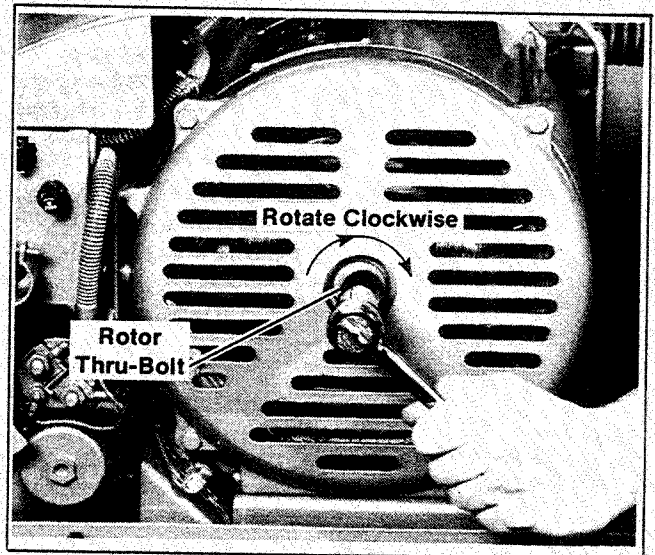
Rotating Rotor for Breaker Point Adjustment
